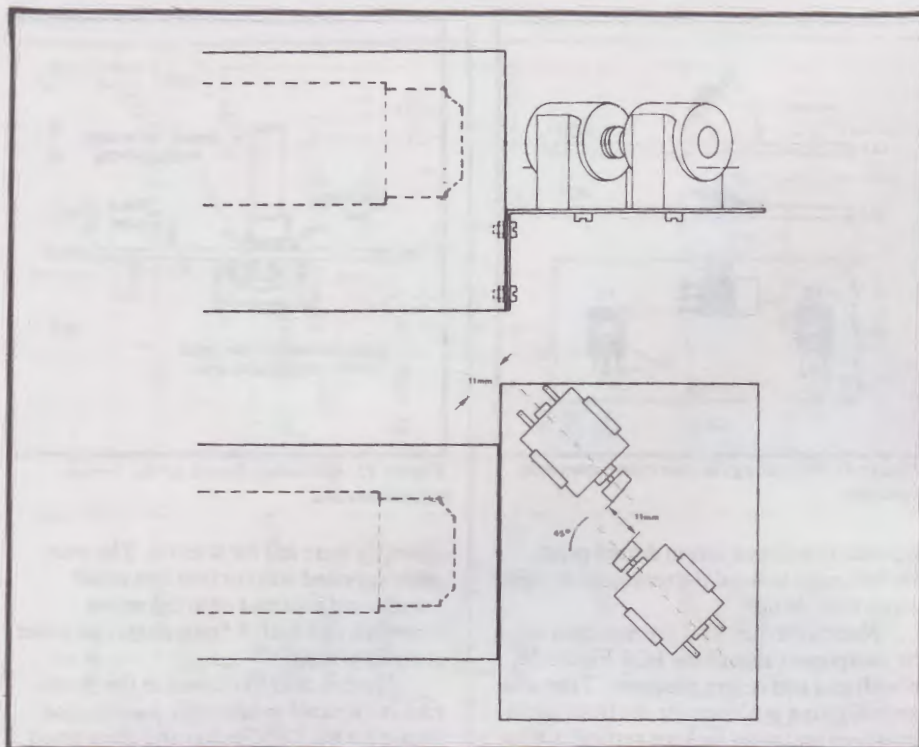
Mounting the motor drive panel on to the laser. Adjustments are critical.
